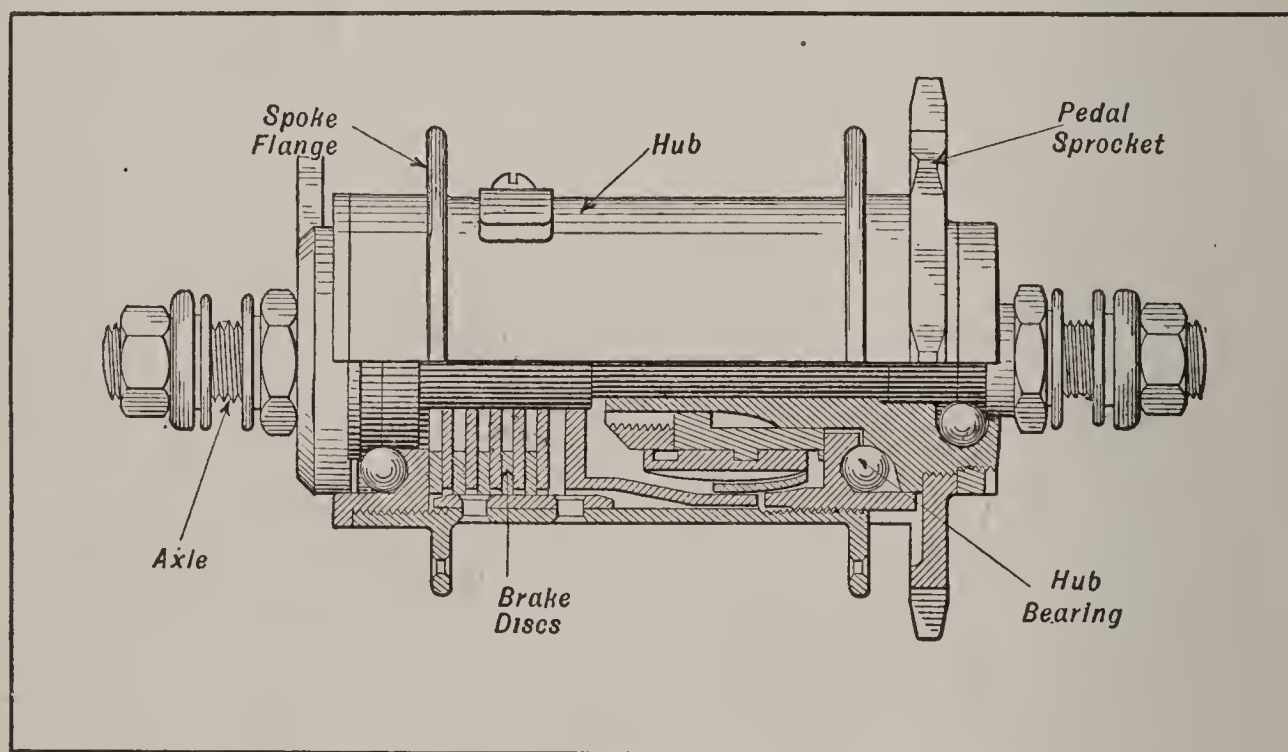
Typical Multiple Disc Coasting and Braking Hub.
